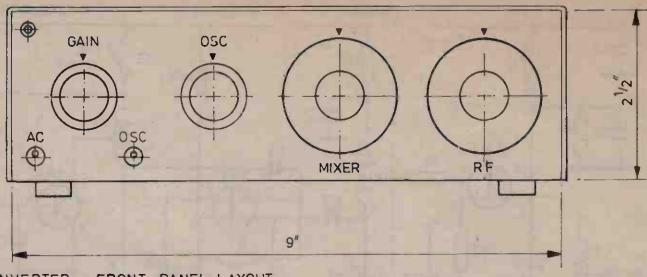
HF CONVERTER - FRONT PANEL LAYOUT
